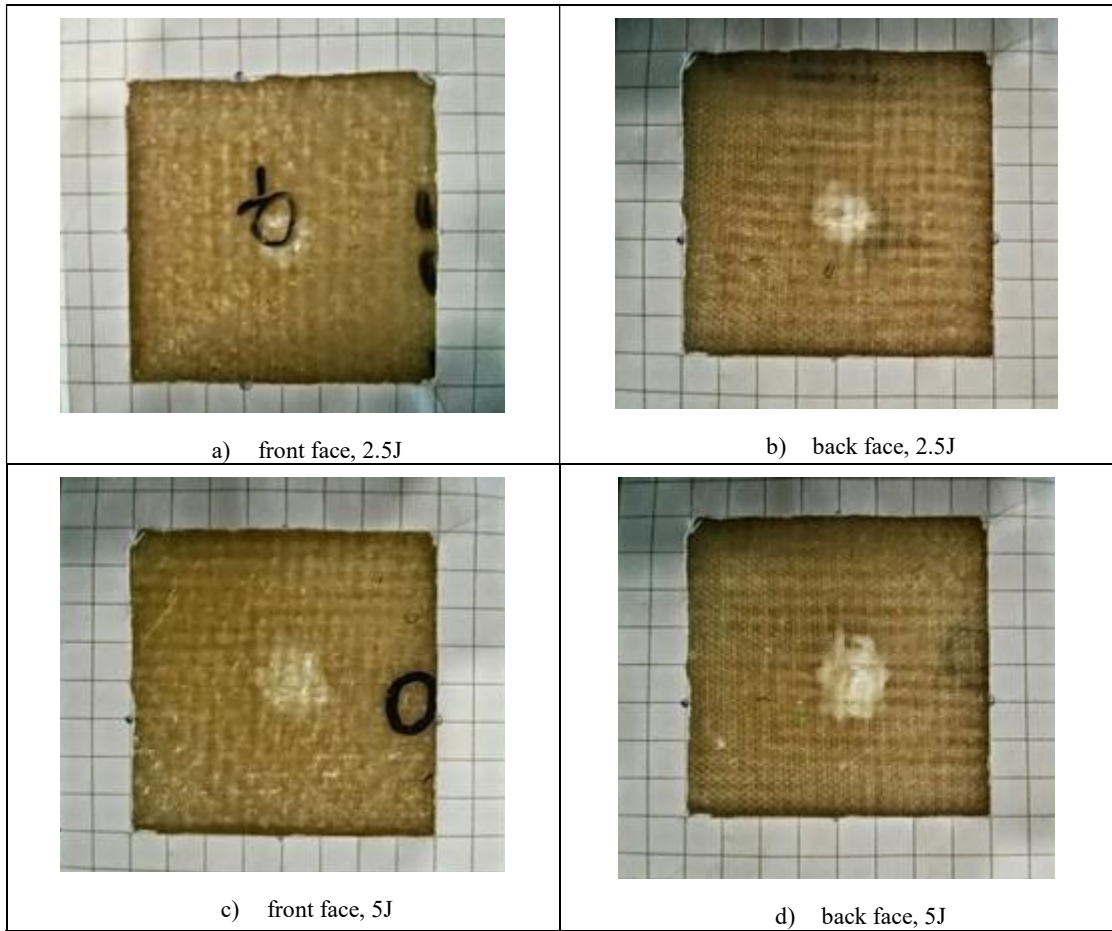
Front and back face pictures after mechanical impact on GE1 sample
